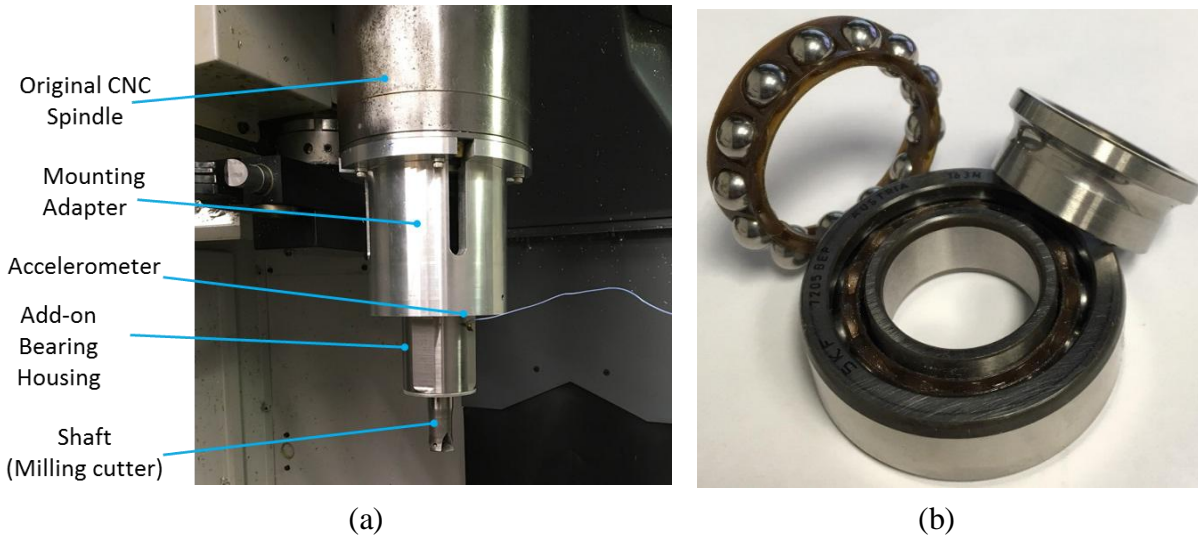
(a) CNC-based bearing test setup (b) The tested bearing.
